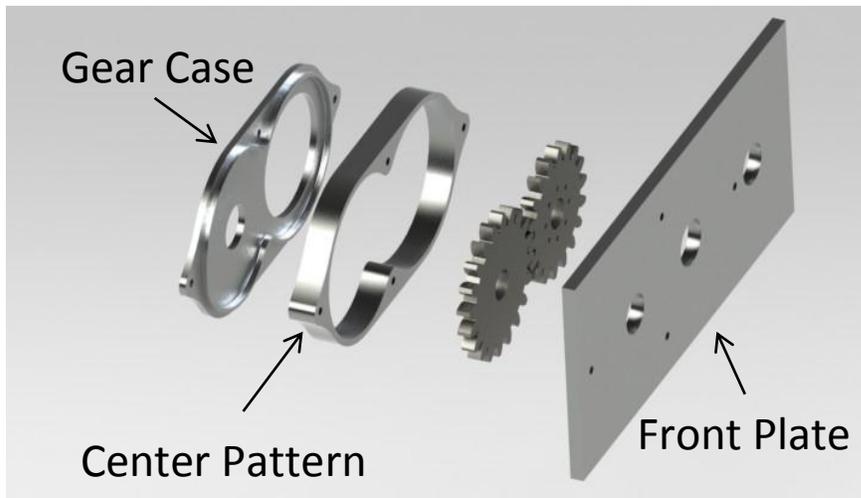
6160 AL plates, gear and pinion, and gear case enclosure
